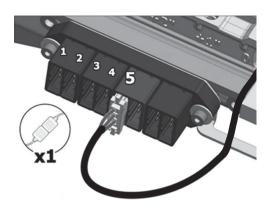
The Tilt motor cabling is attached to the contact block on the seat frame.
